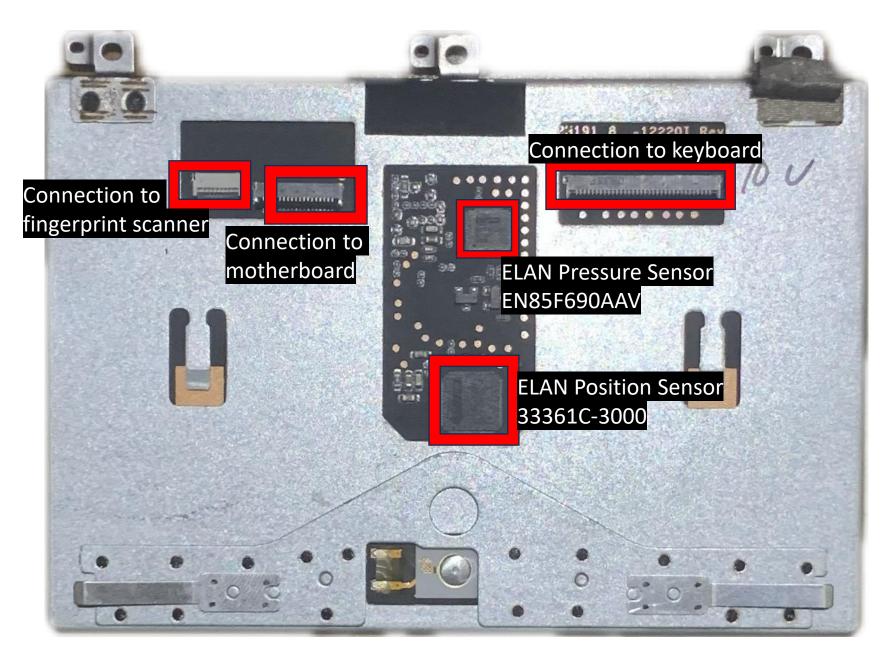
Surface Laptop Go Trackpad PCB Diagram
